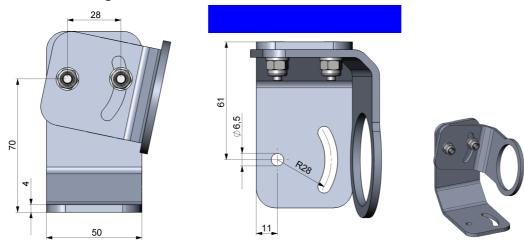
Mounting bracket, adjustable [TM-AB-CTL]
